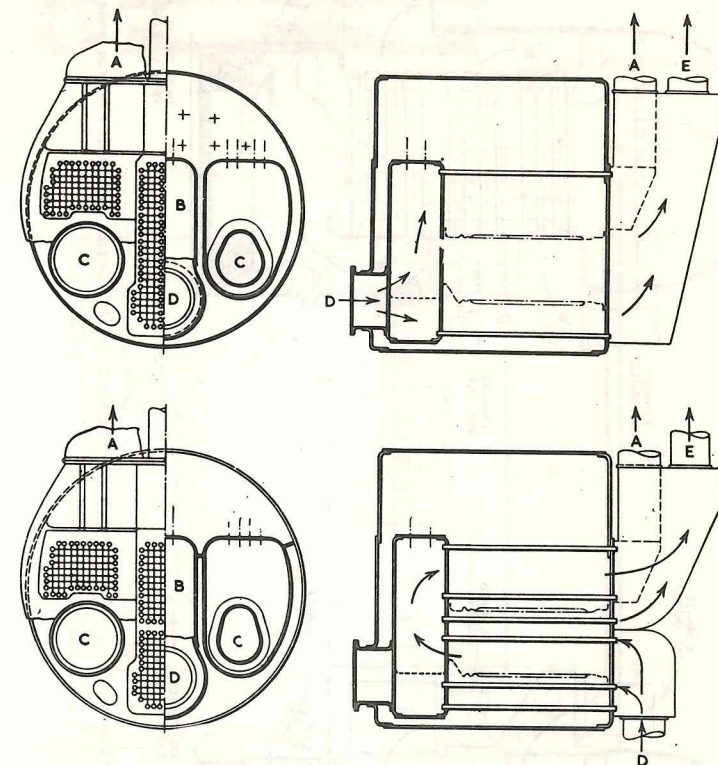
Scotch boiler, modified for use as a composite boiler
